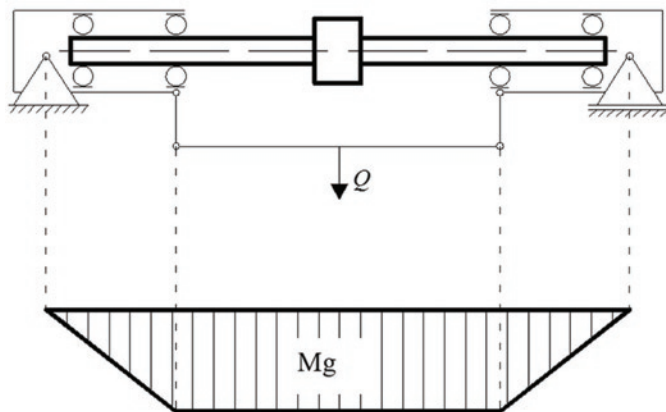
Diagram showing sample fixing in the fatigue testing machine and the load,  $M_g$  – Bending moment
